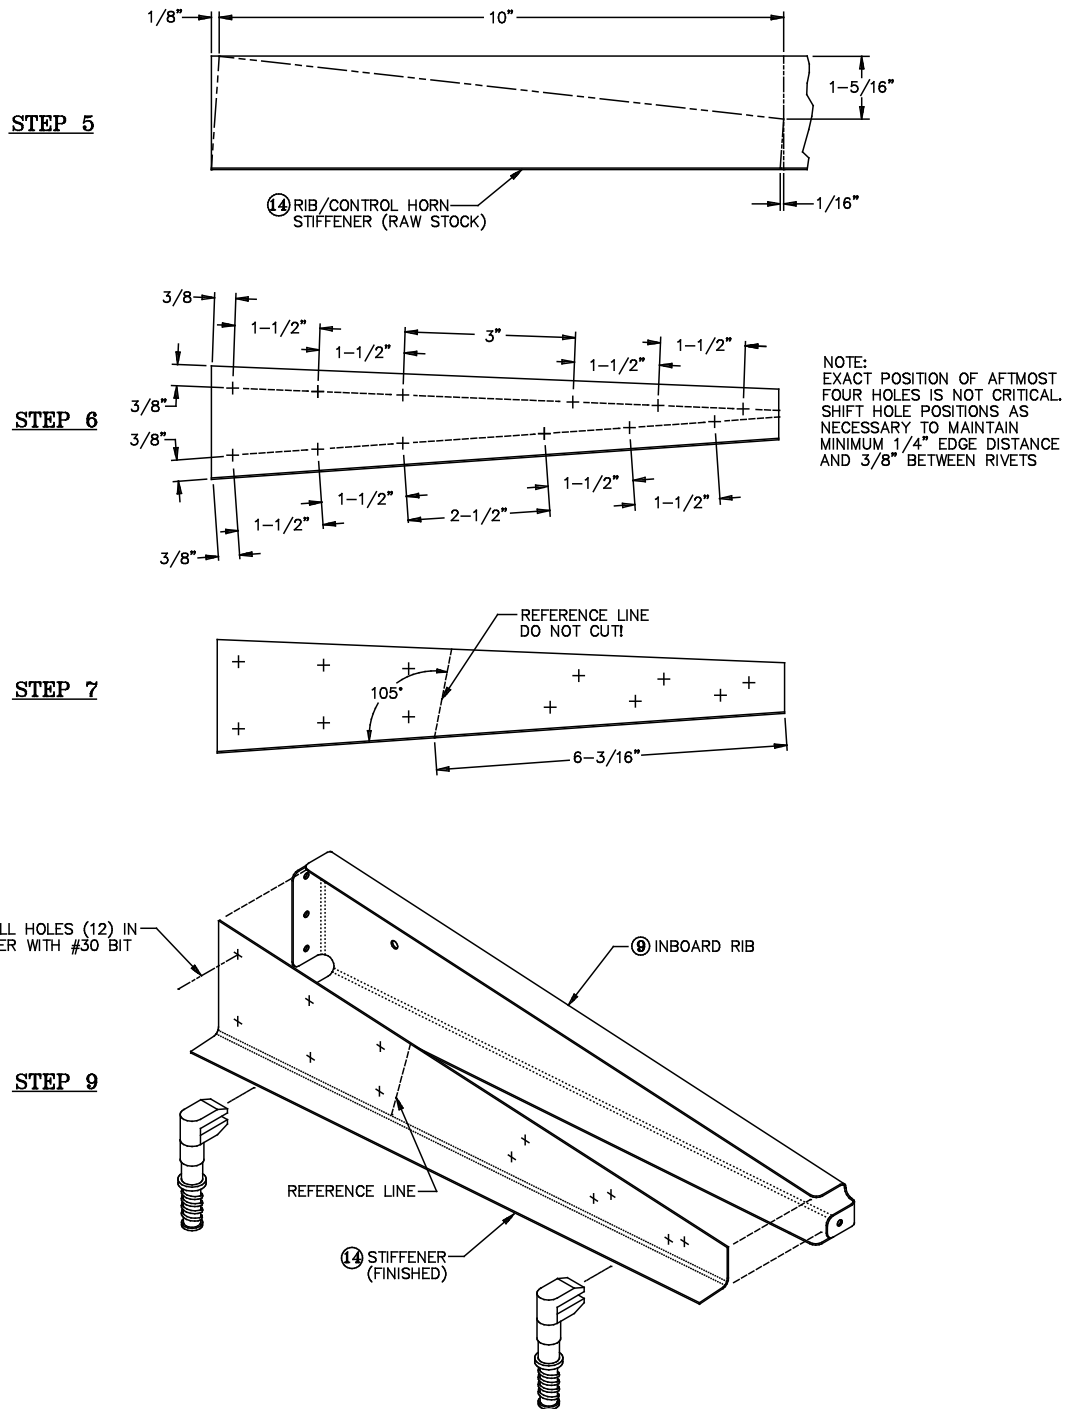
Cutting and Drilling the Rib/Control Horn Stiffeners
